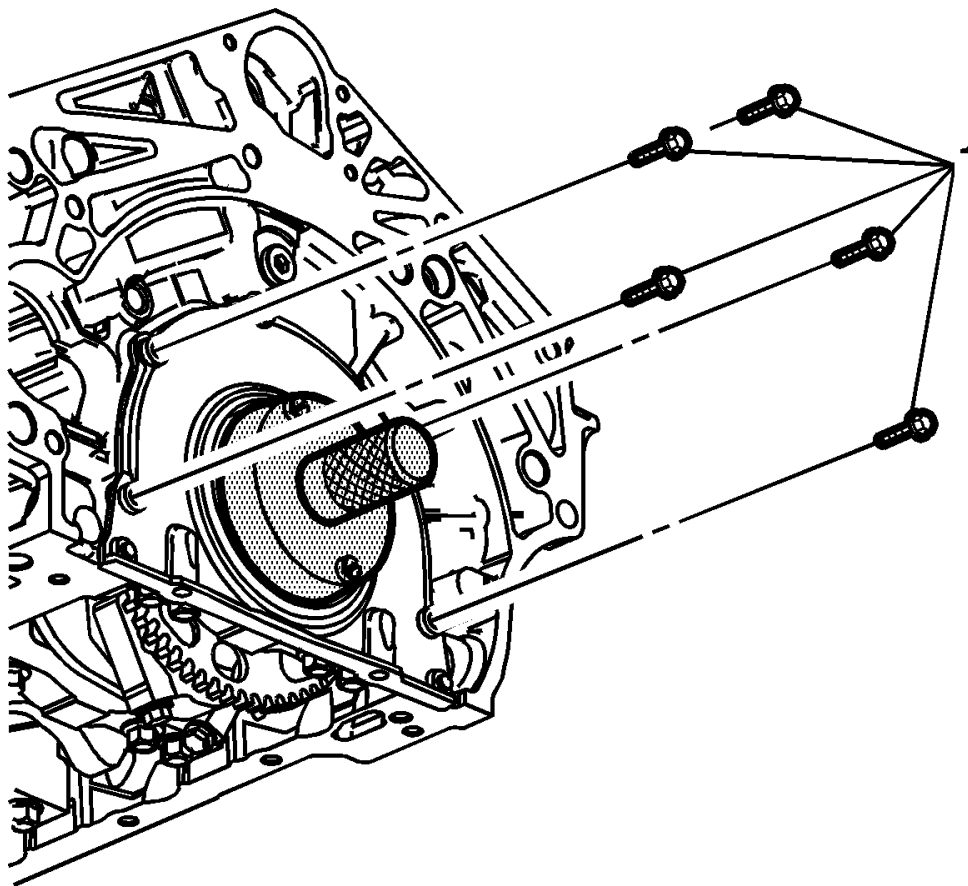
Crankshaft Rear Oil Seal Housing Bolts
